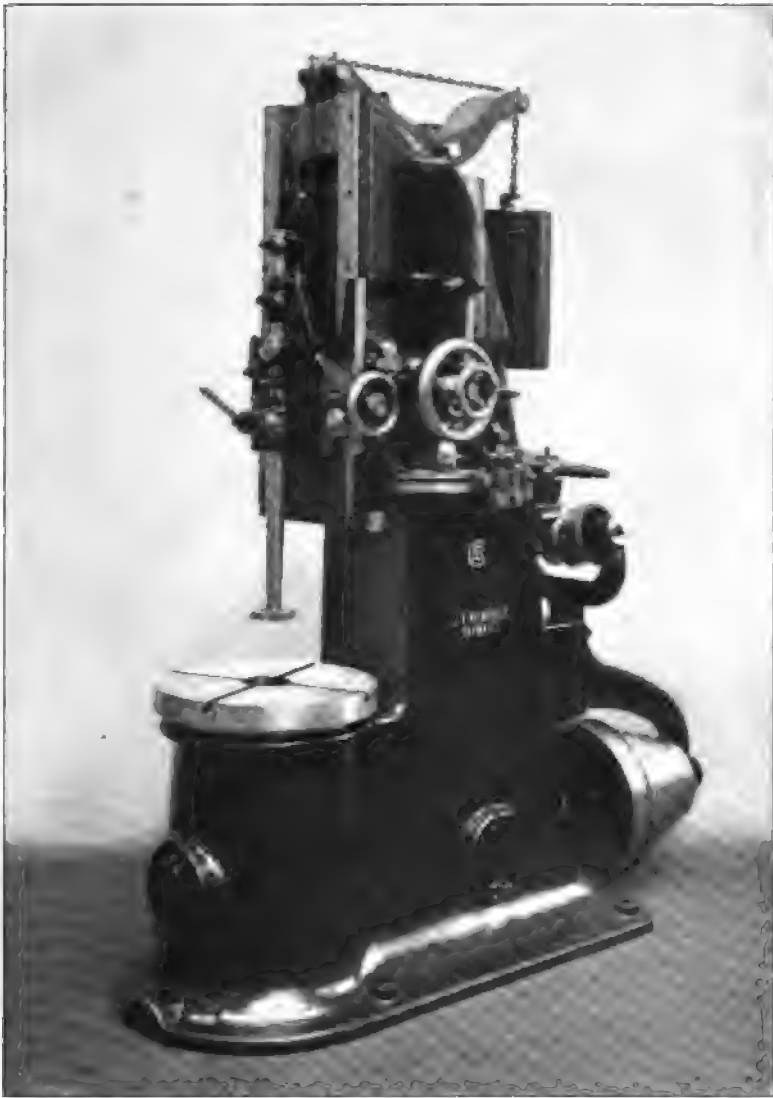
VERTICAL-SPINDLE MACHINE FOR GRINDING HOLES UP TO 14 INCHES IN DIAMETER.
